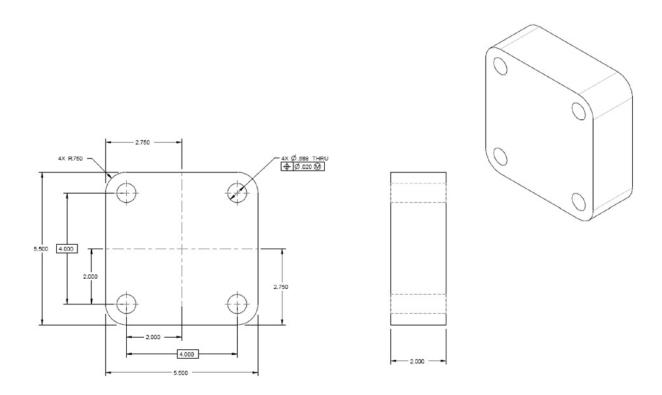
Dimensional drawing for fabricating Ejector cylinder Mount Spacer Plate
